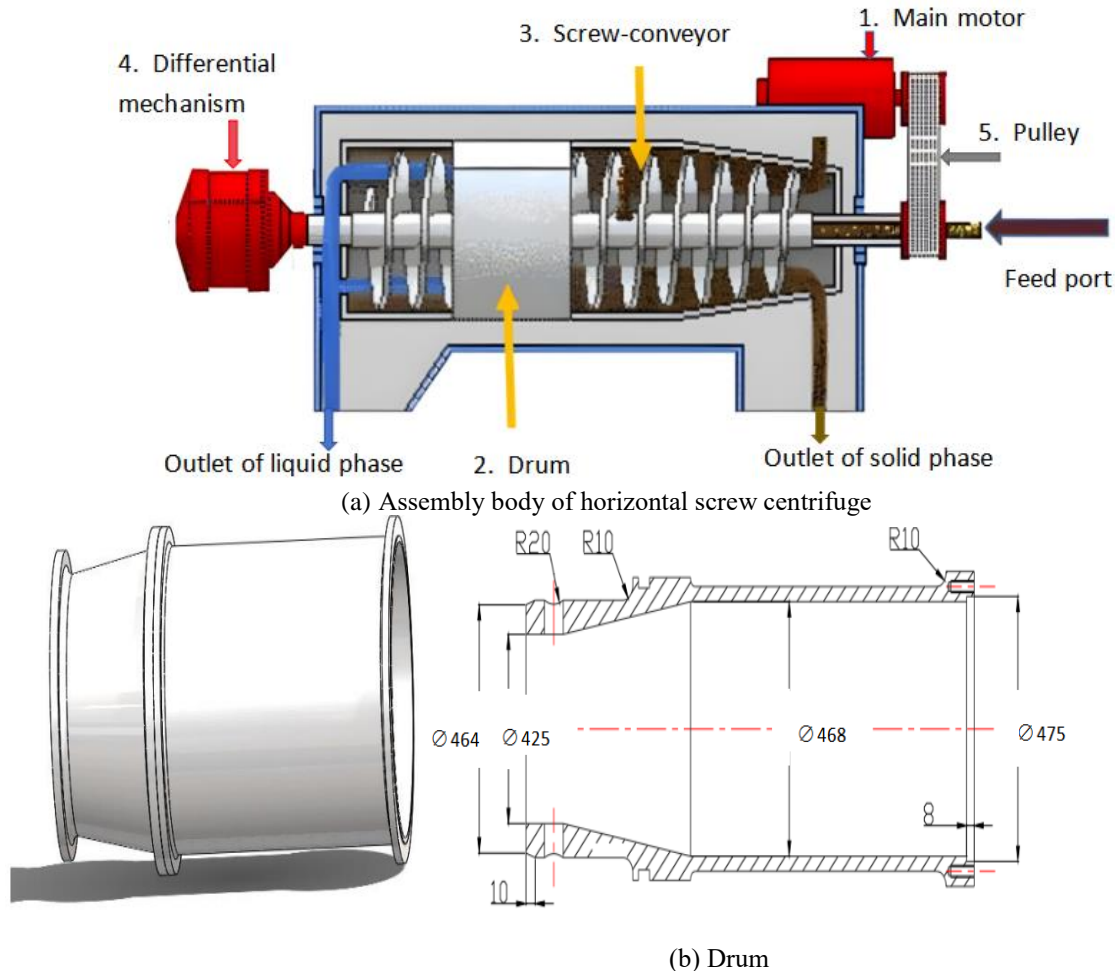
3D structure of horizontal screw centrifuge and its drum
